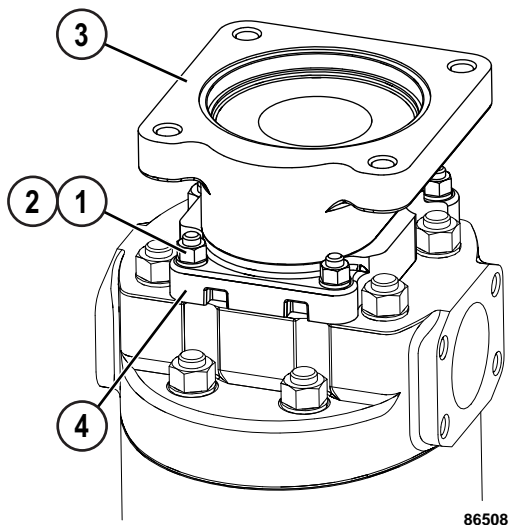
HOIST PUMP DISASSEMBLY & ASSEMBLY
